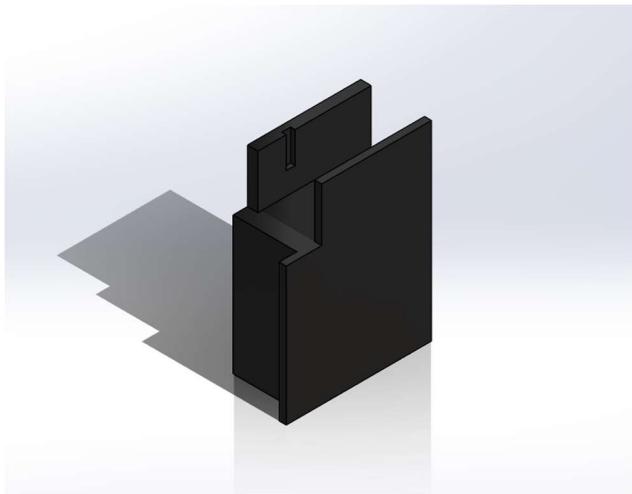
A picture of the holder for the motor that ejects houses from the reflection factory.
